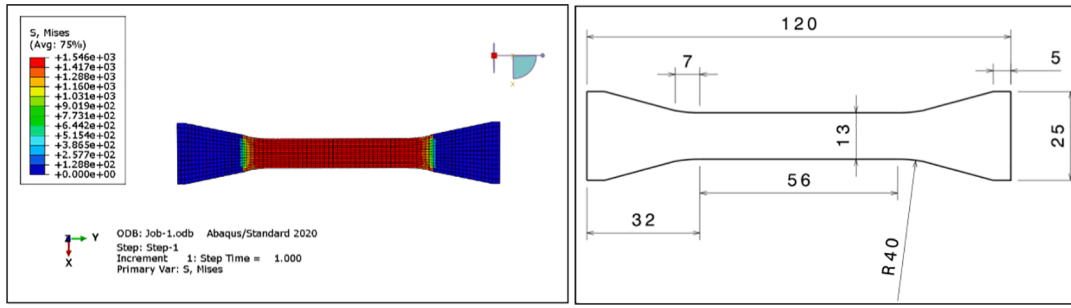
Specimen geometry and dimensions applied for tensile test.
